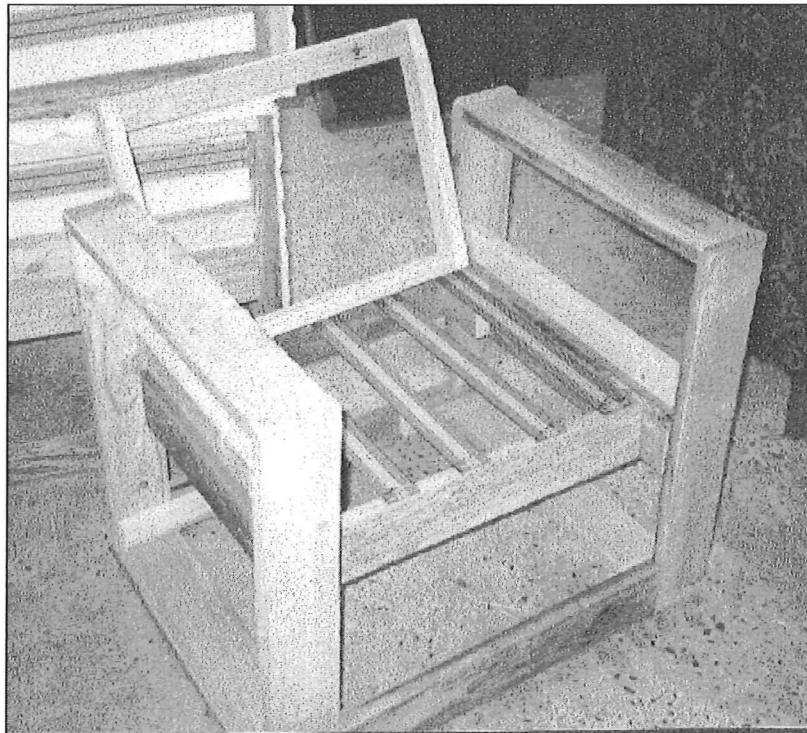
Typical Armchair Frame: Note the seat webbing suspension.
